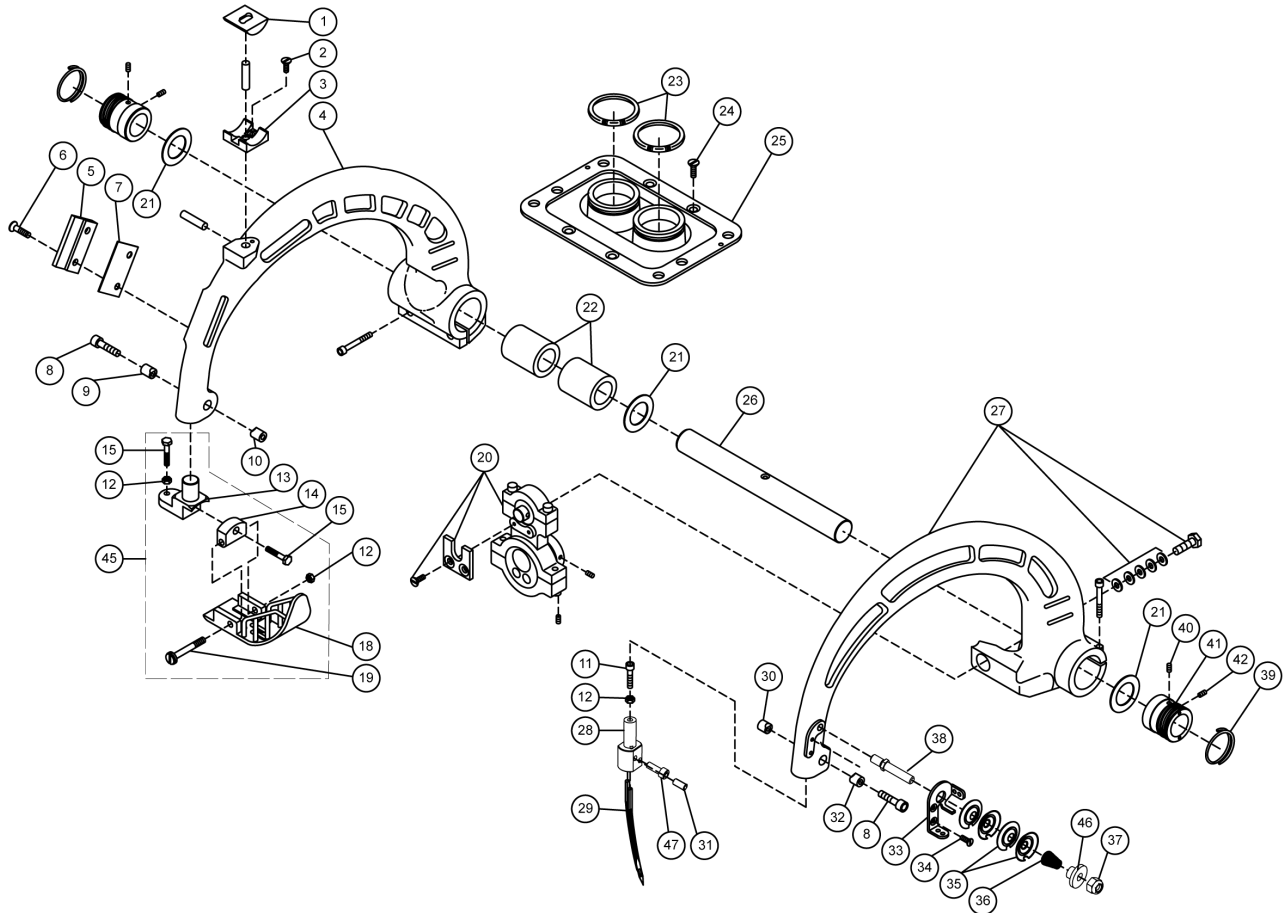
Model 100-2-R2 Needle and Presser Foot Assembly
